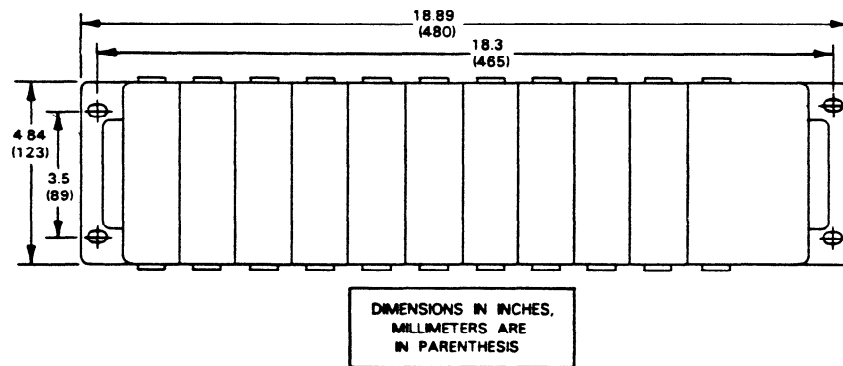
10 Slot Rack, 19 Inch Mounting Dimensions
